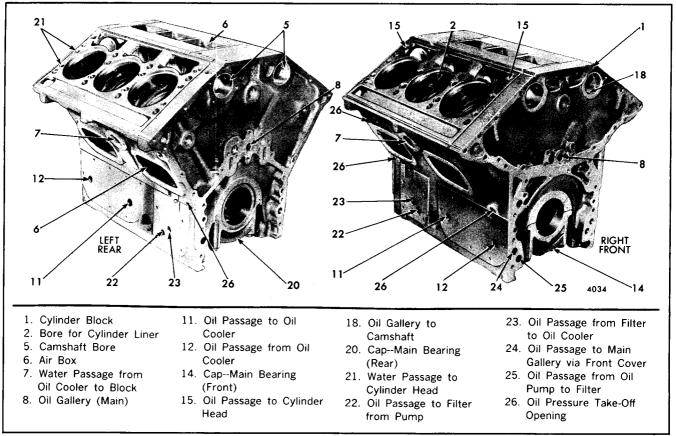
Cylinder Block (6V-53 Cast Iron Cylinder Block Shown)
